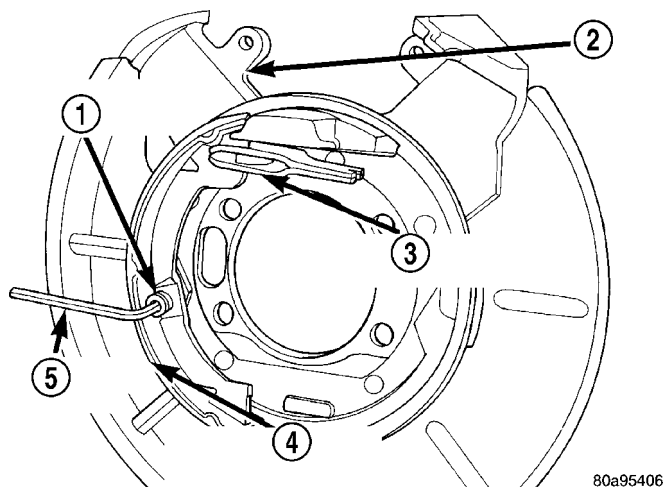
Trailing Brake Shoe Hold Down Pin And Spring
